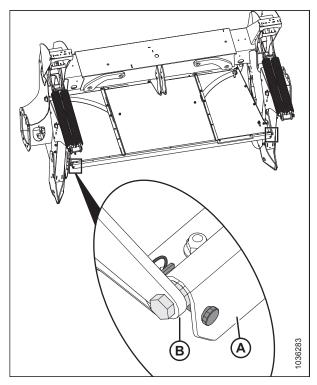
Forming Shield – For use with R216 Rotary Disc Header
